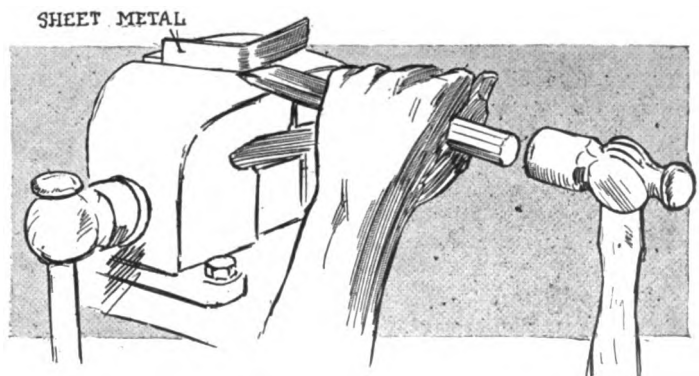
Method of cutting sheet metal with a cold chisel and a vise
